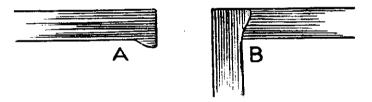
WELDING FLAT IRONS AT RIGHT ANGLES
